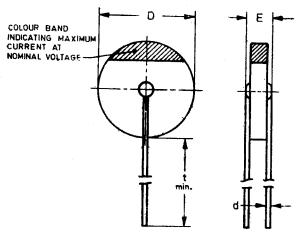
OUTLINE DRAWING AND DIMENSIONS
